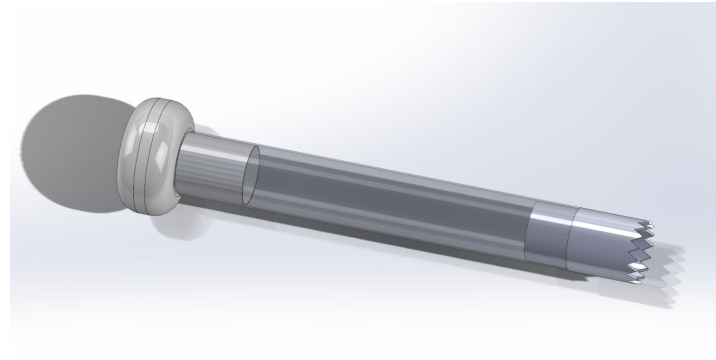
,9: SOLIDWORKS Pineapple Corer Blade which includes toothed, rounded tip; Full Assembly
